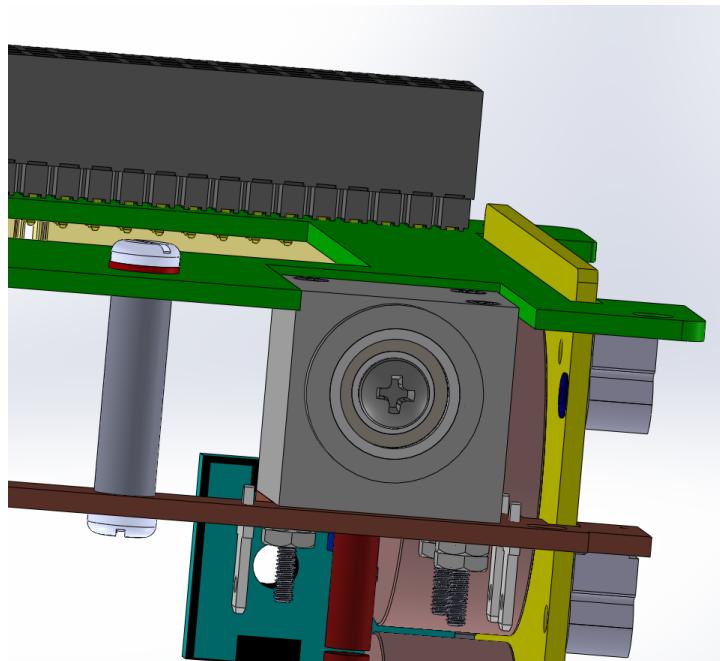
When connected, the Spacers, Belleville Spring Lock Washers, and M3 (FH) Spacer Screws should look like this.
